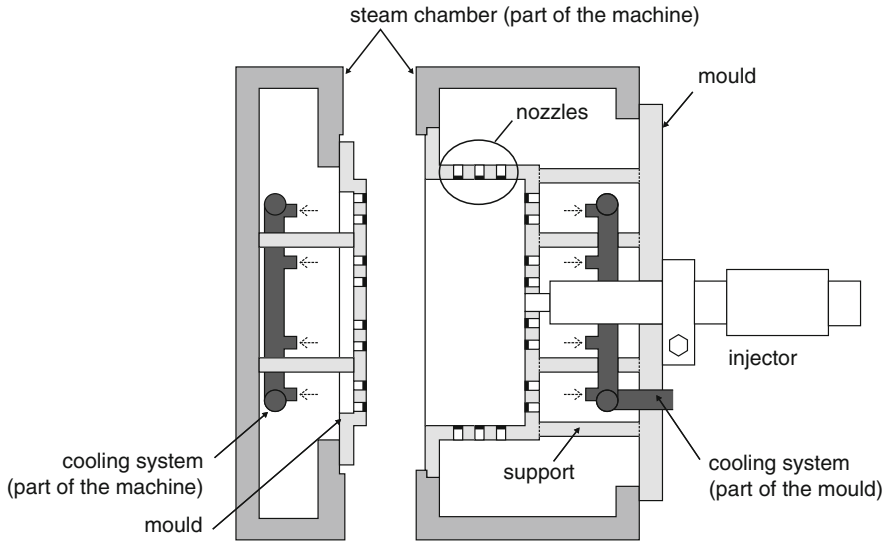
Schematic drawing of an EPP mold inside the steam chamber
